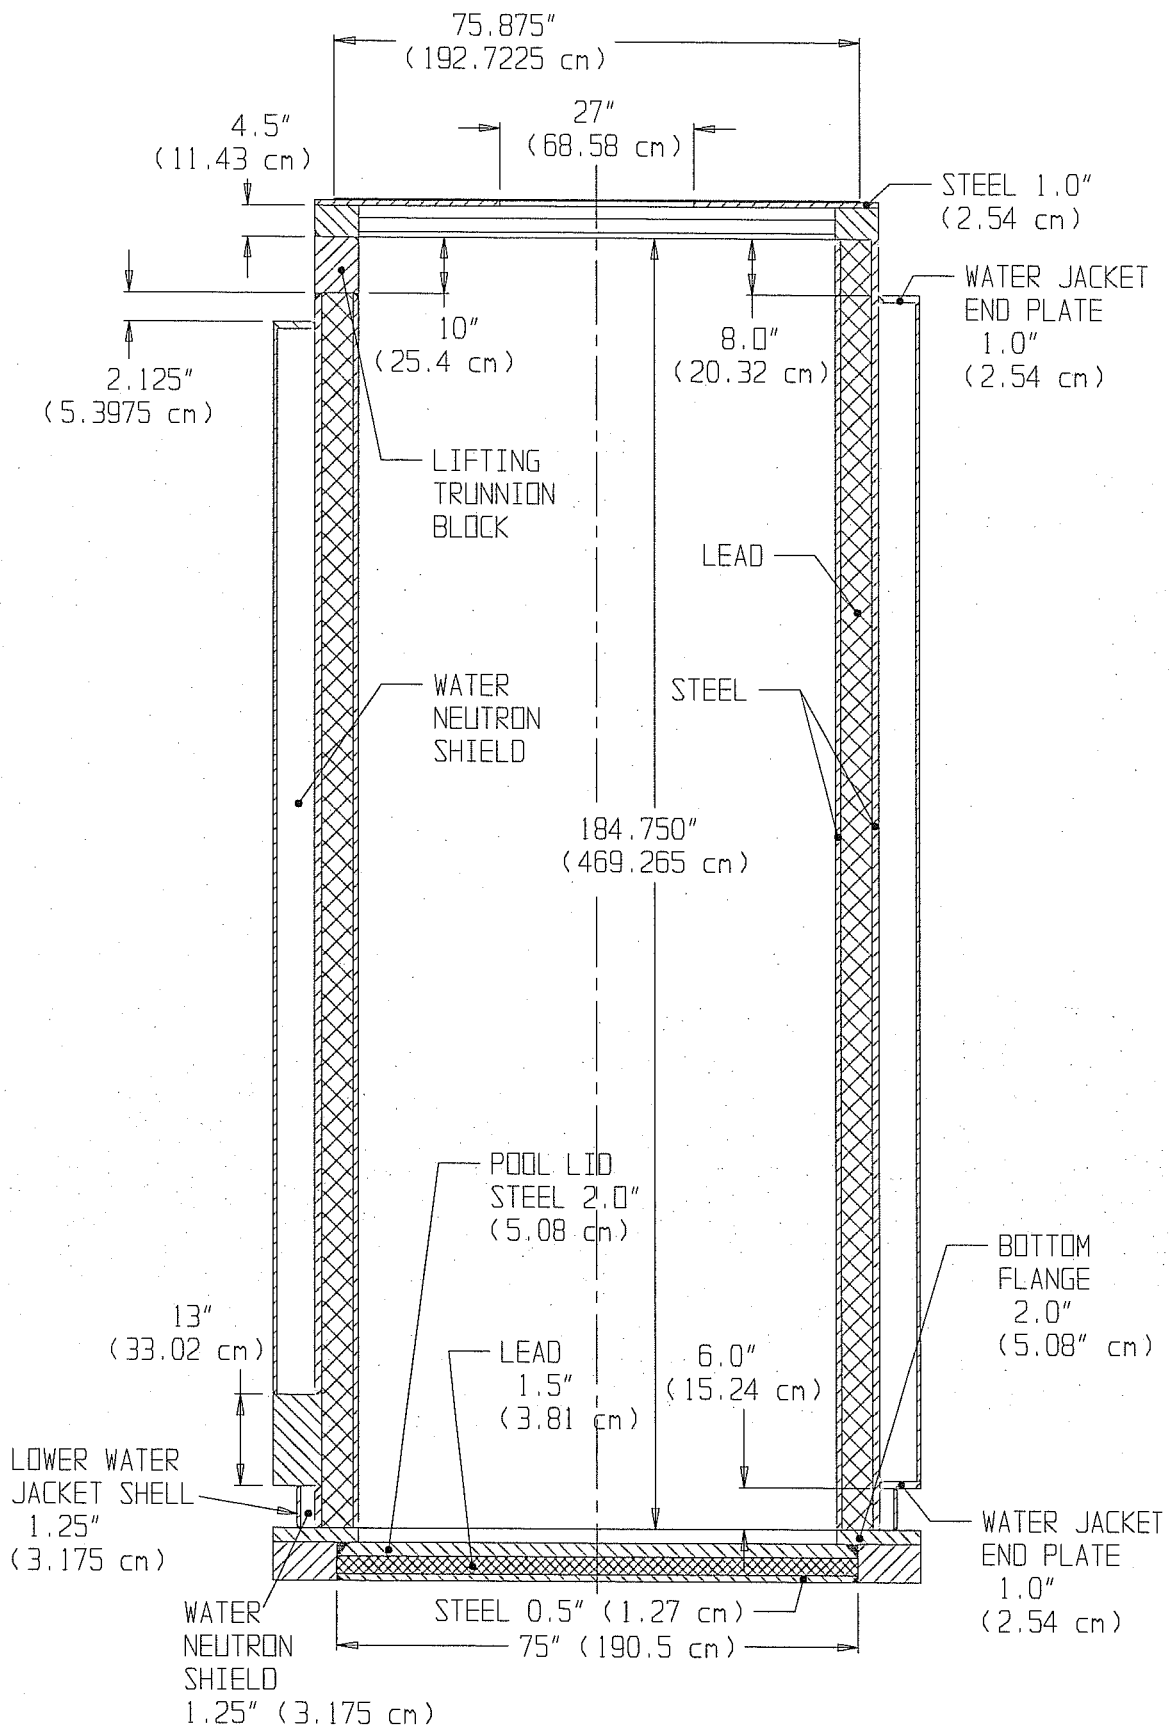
; 100-TON HI-TRAC TRANSFER CASK WITH POOL LID CROSS SECTIONAL ELEVATION VIEW (AS MODELED)
